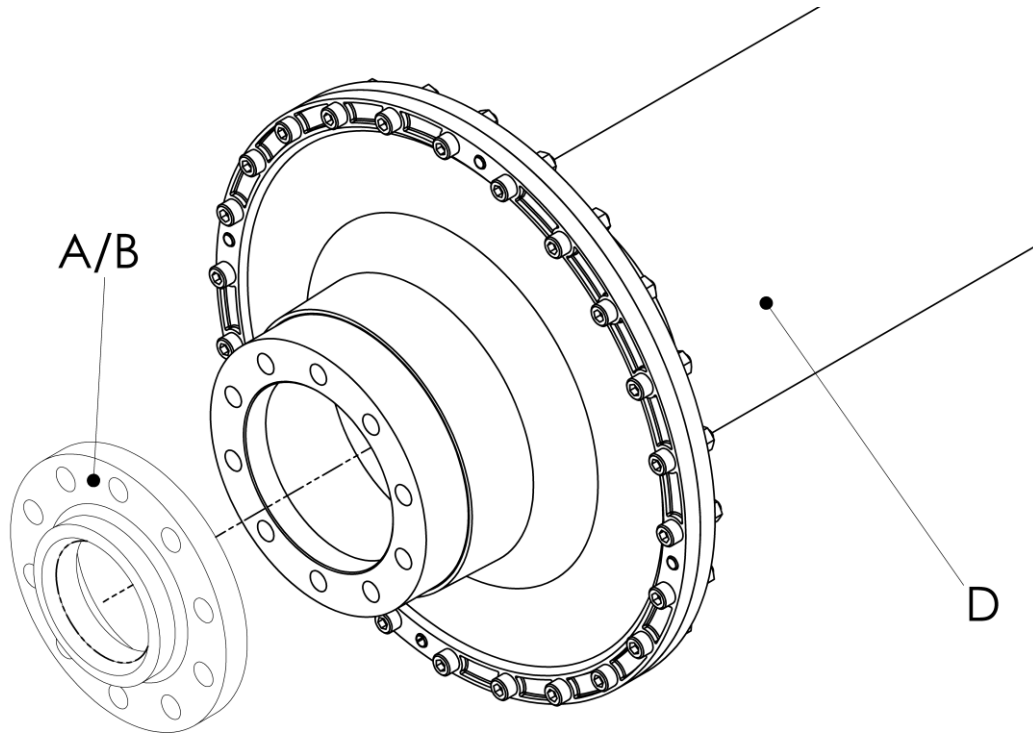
Mounting the pre-mounted supplied coupling to flange (A/B)
